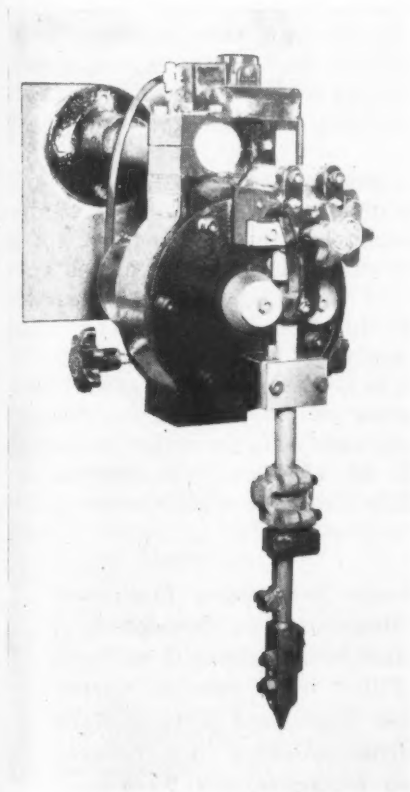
Automatic Arc-welding Head Designed for Use with Coil Type Electrodes
